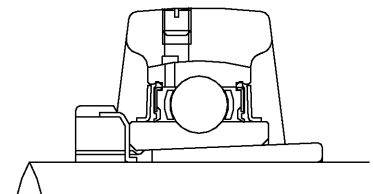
Lubrication-free type insert bearing unit (Steel-plug filled specifications)
